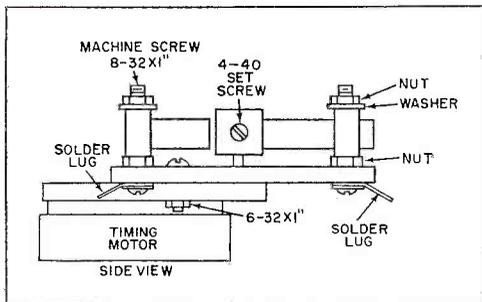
Stationary contacts (side view) should be positioned to provide gentle contact and timed to extinguish the light just before the ring reaches it.
